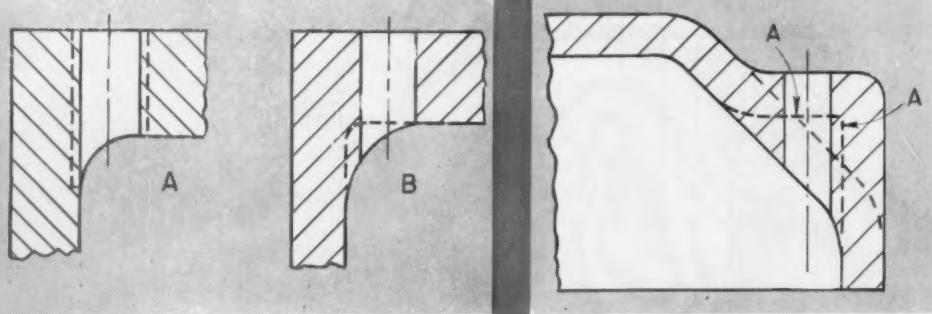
(A)—In this design, drill not only must machine away metal formed by radius, but must scrape against casting scale. (B)—Drilled hole before tapping should be like shown.
